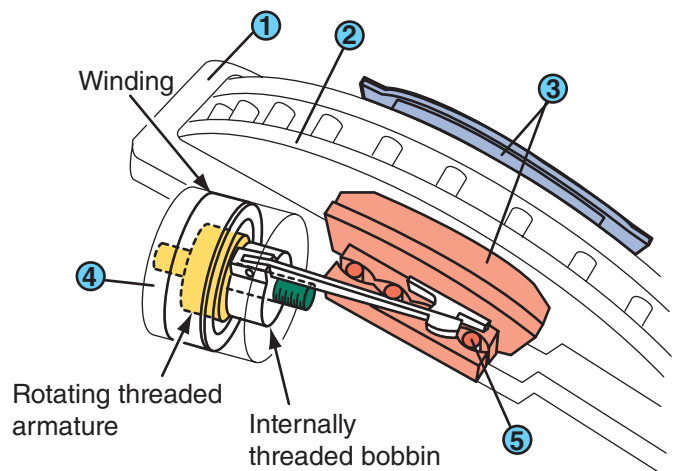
The layout of an electronic wedge brake. The brake caliper (1) spans the brake disc (2) on two sides. The brake disc is braked by a pad (3) that is moved by an electric motor (4) via several rollers (5) along wedge-shaped faces.
